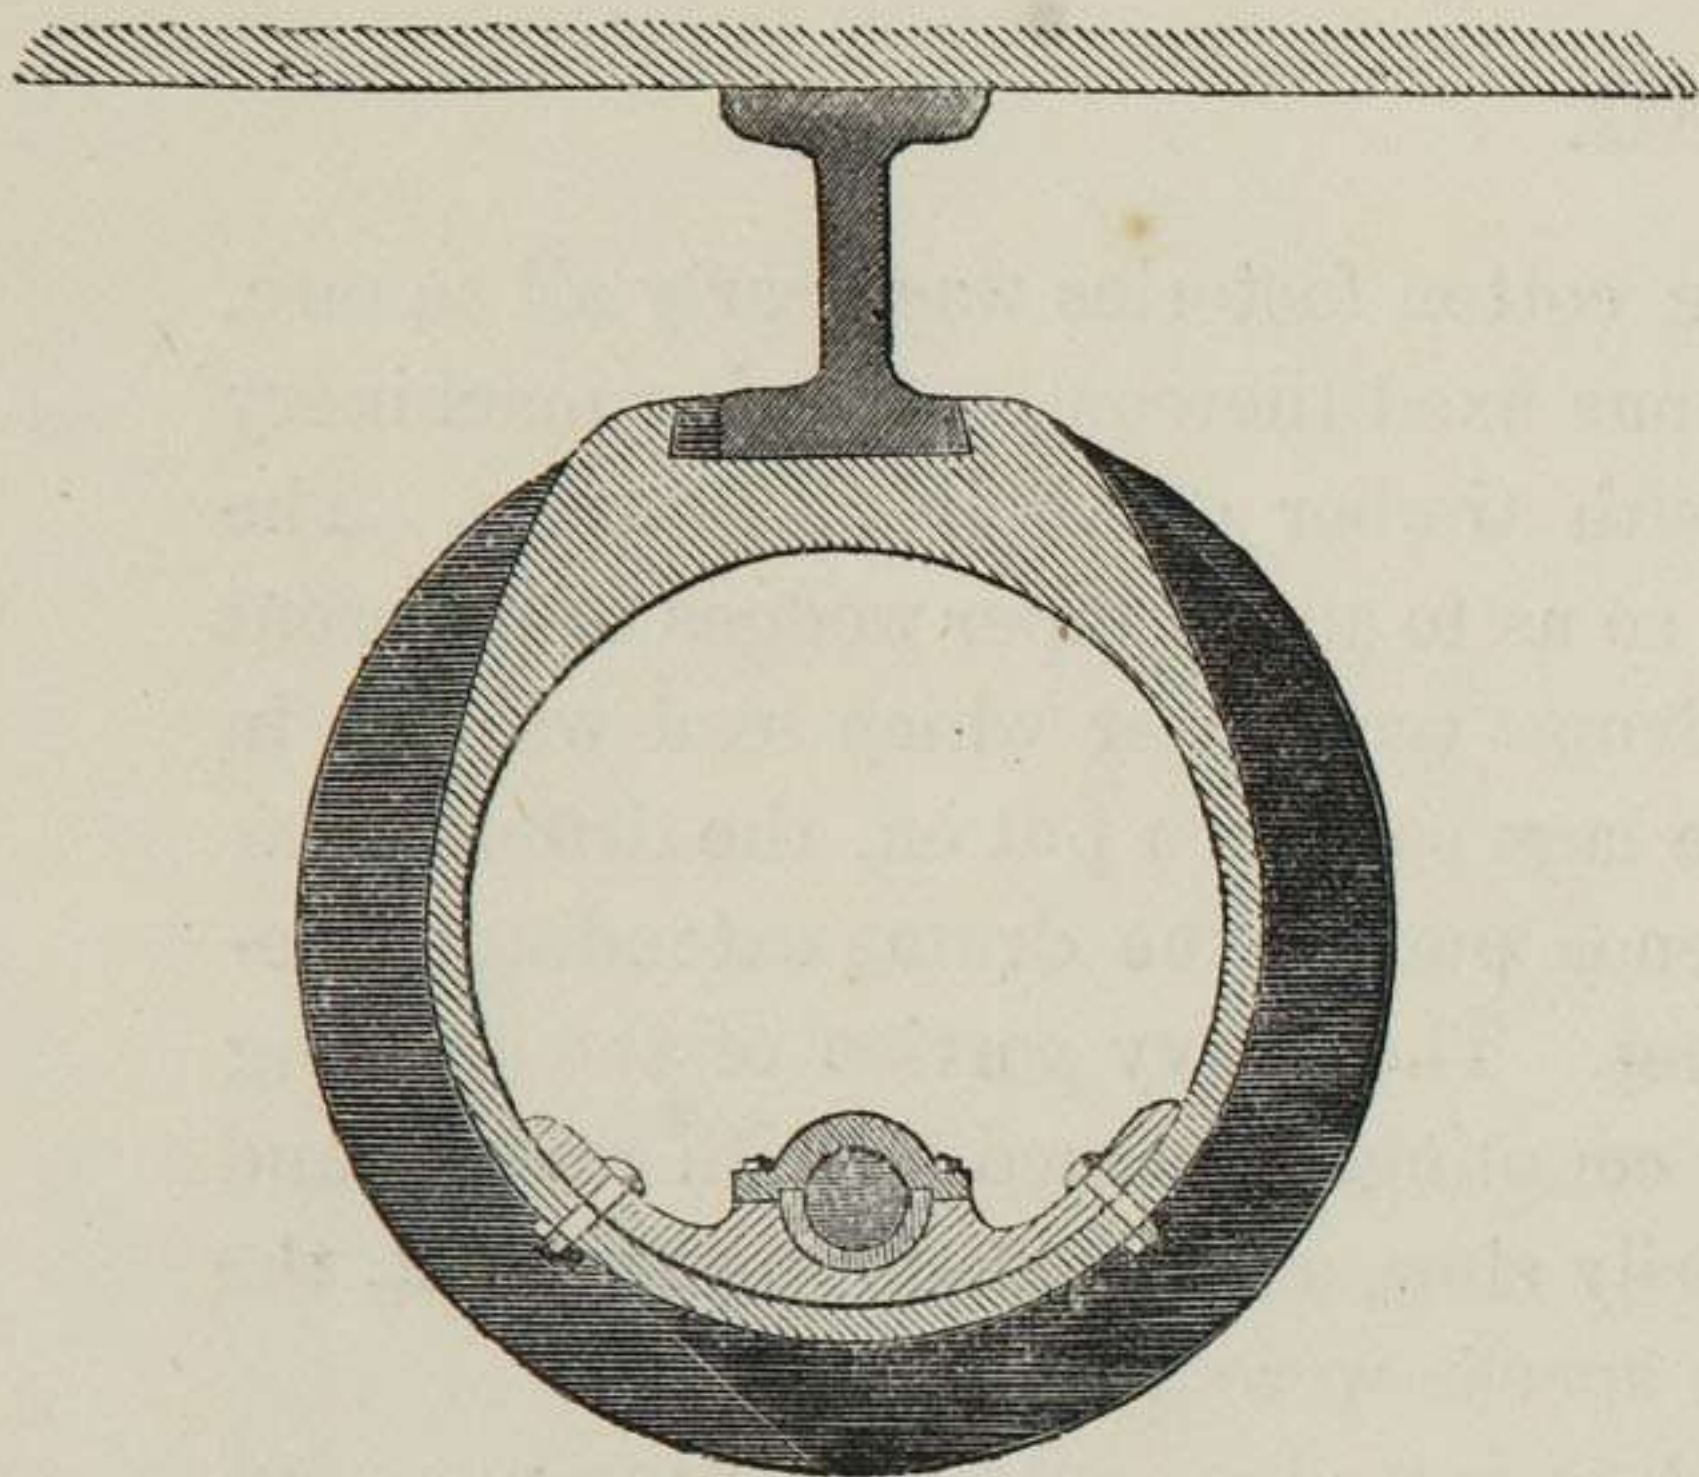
Section of Girder, Hanger, Pedestal, and Shaft.
